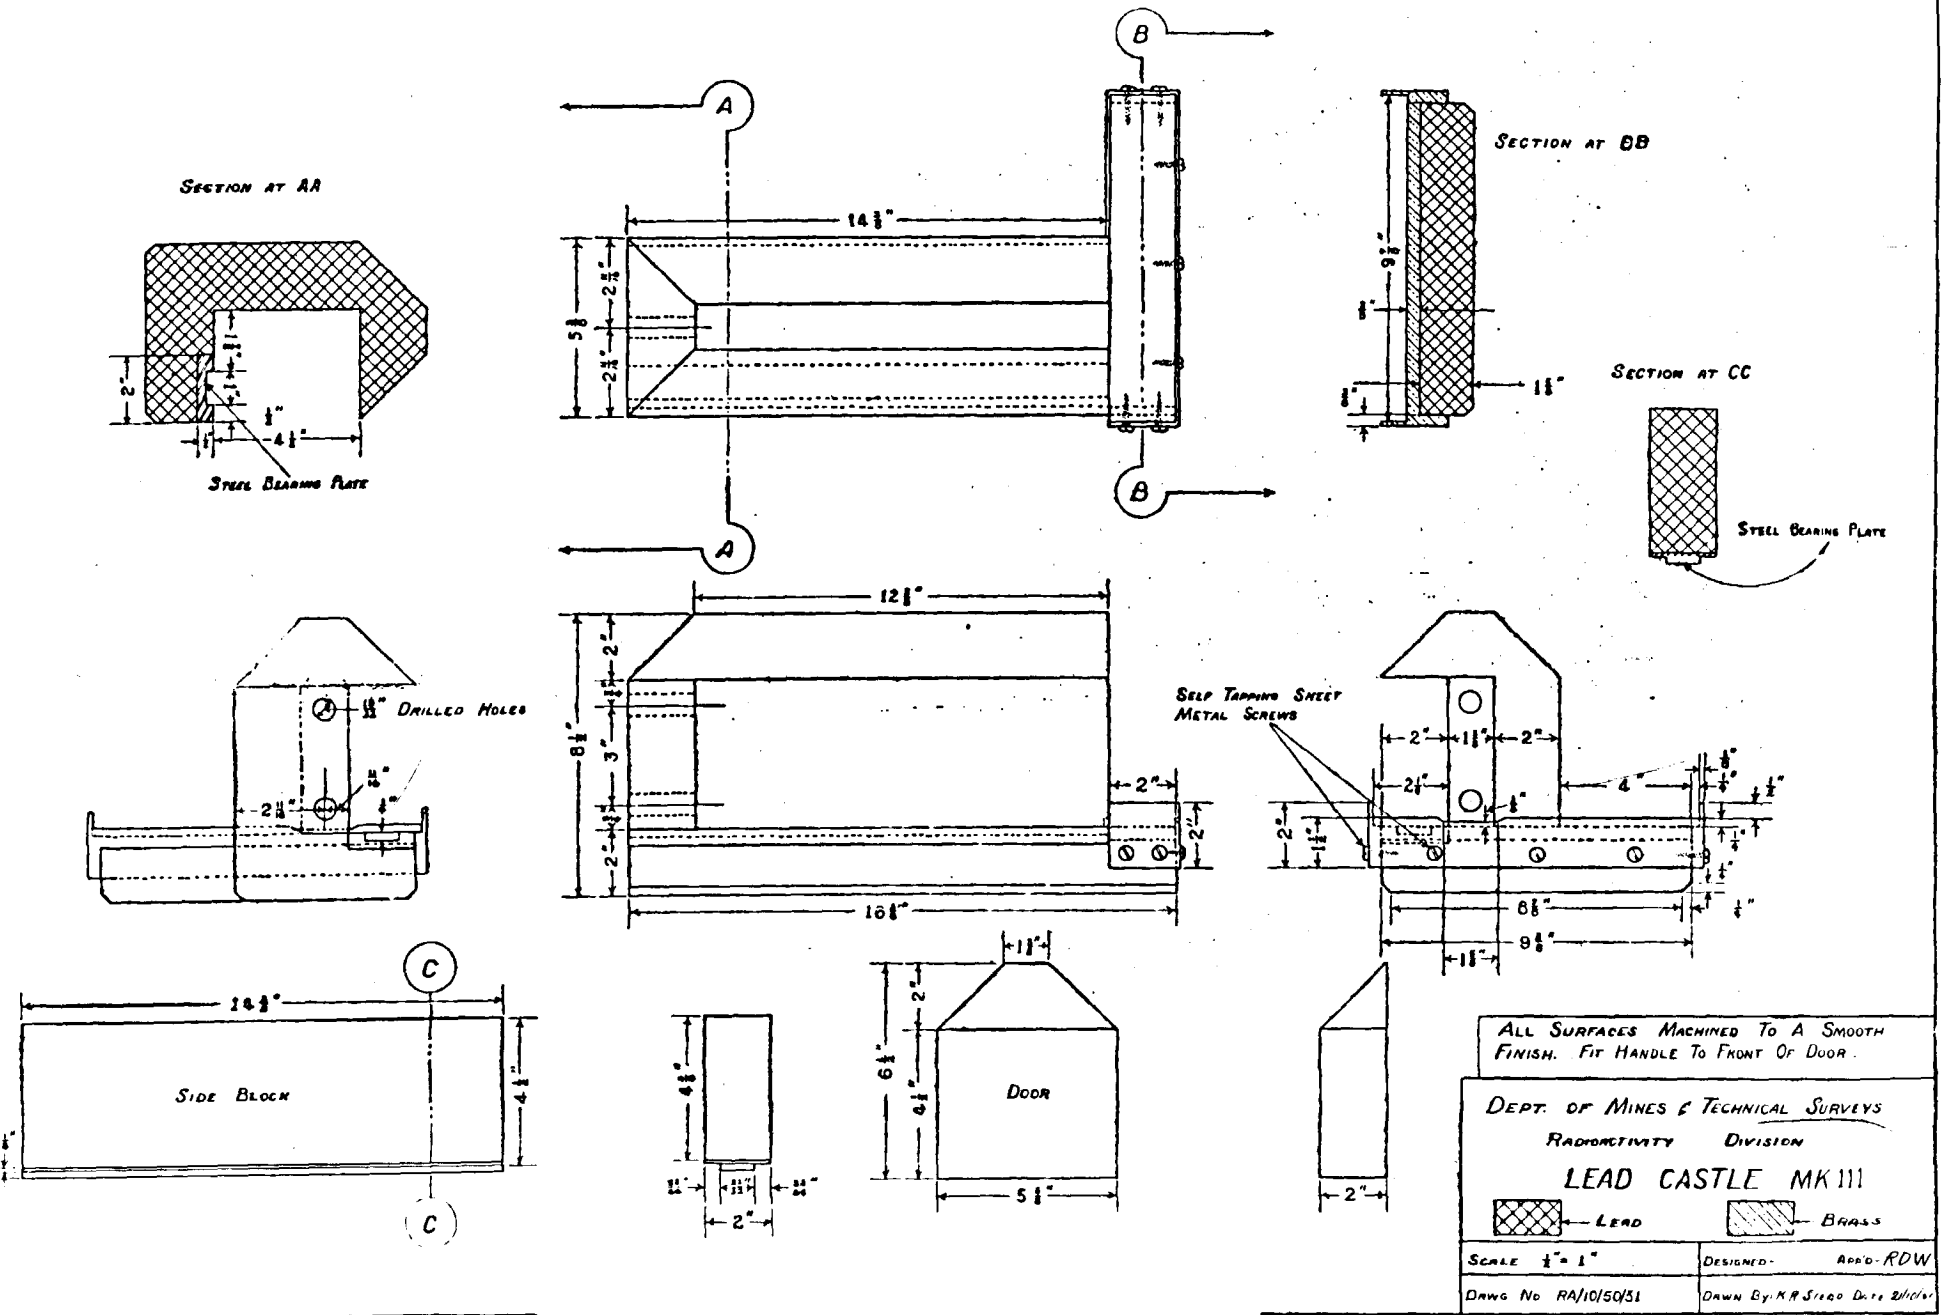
WORKING DRAWING FOR LEAD SHIELD
